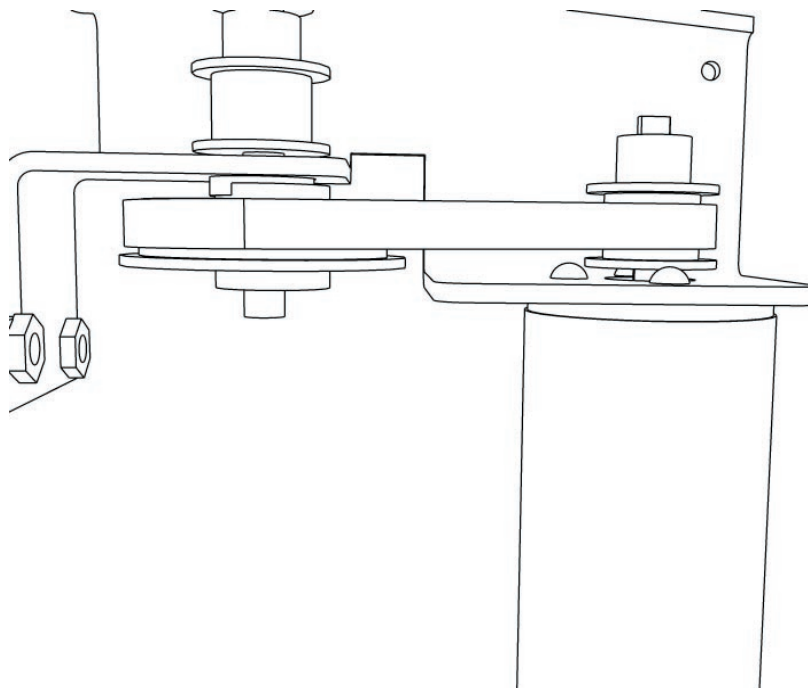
Belt is level with the transmission body when the motor is turned.
